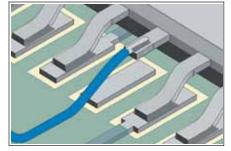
Acceptable* Wire soldered to clipped component lead. +
